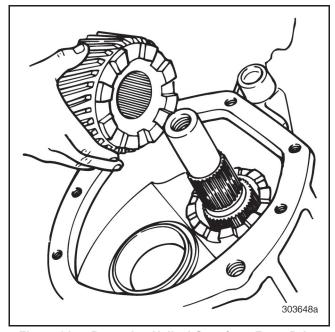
Removing Helical Gear from Front-Drive Shaft
